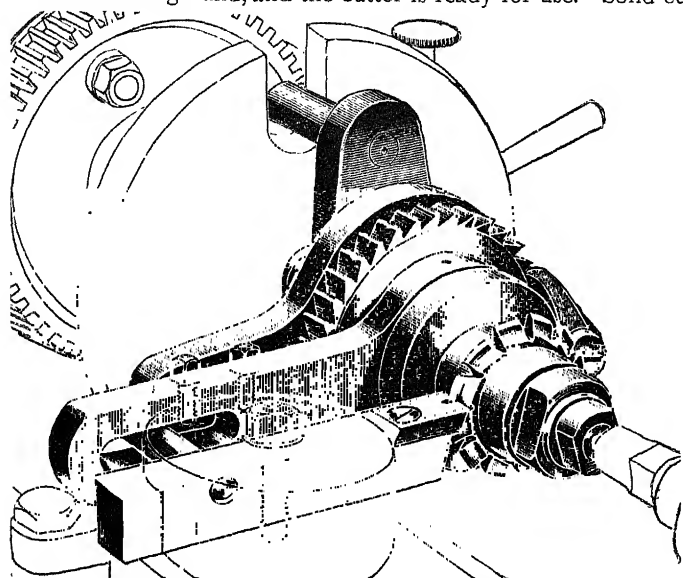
“Backing-off” milling cutter, by Selig Sonnenthal.
